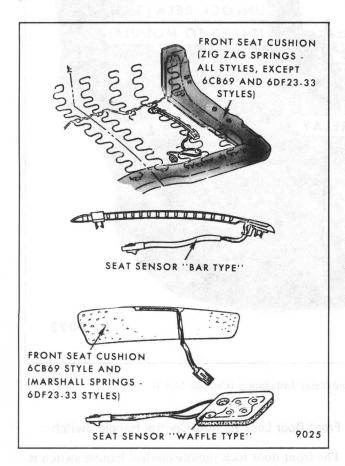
Automatic Door Lock Seat Sensor Switches (Cadillac Styles)
